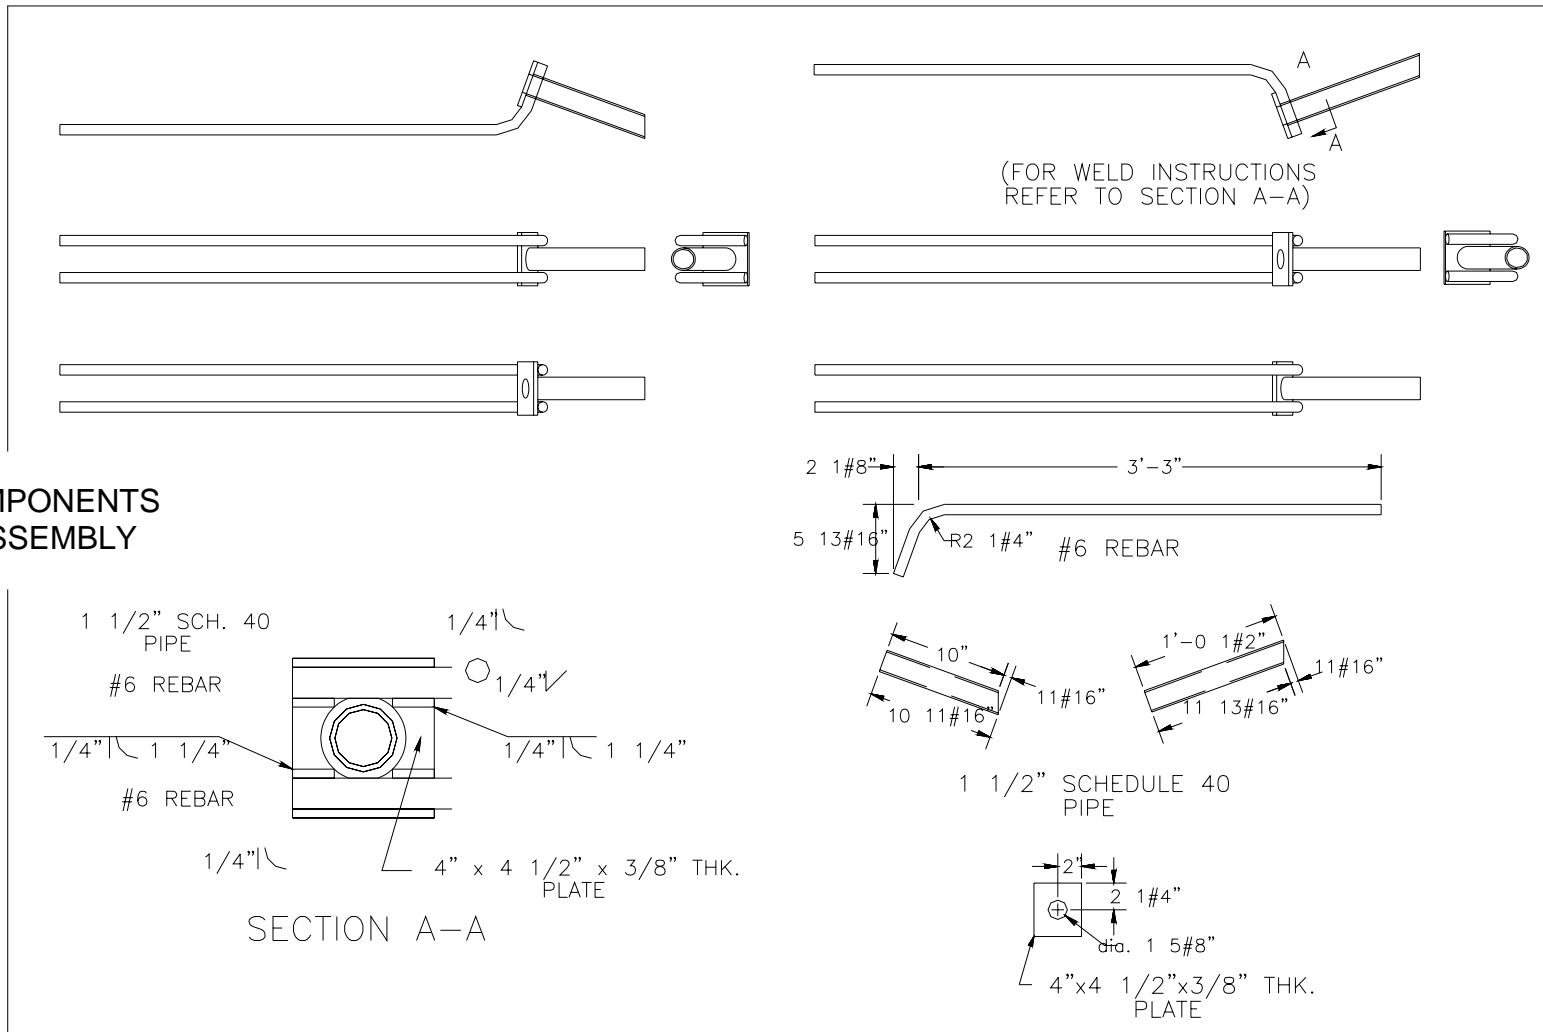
Subcomponents and Assembly Details of the Cross-Bolt, F-Shape Precast Concrete Traffic Barrier.
